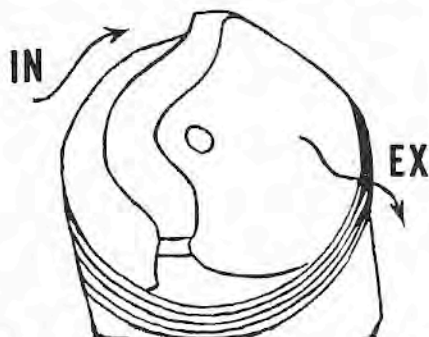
Piston baffle is designed to insure proper scavenging. Piston must be installed as indicated, with relation to inlet and exhaust ports.
